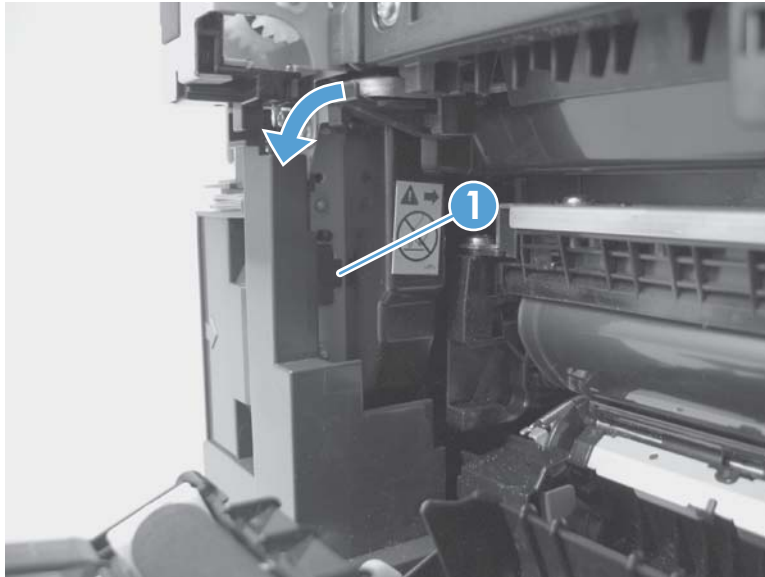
Remove the rear-lower cover and rear-door links (1 of 6)
